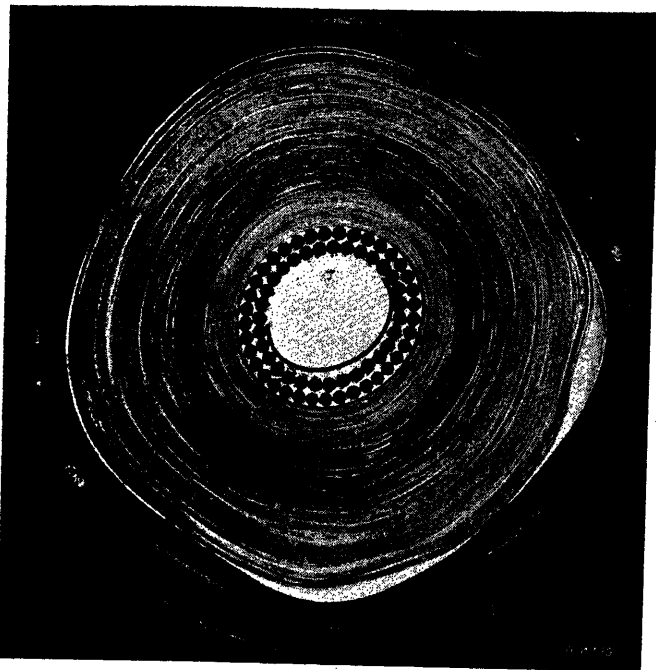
Wafer of 132-kv oil-filled cable of European manufacture
